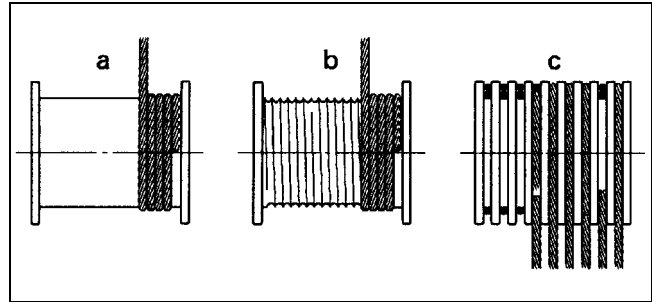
Drum types: (a) smooth, (b) grooved, and (c) disk-layered
